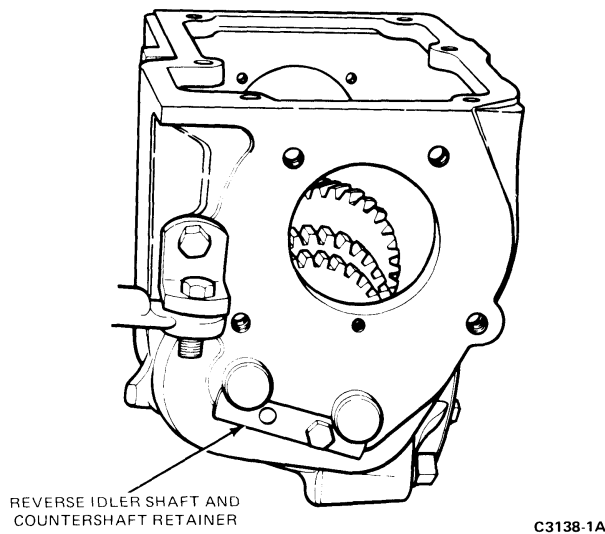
Reverse Idler Gear Shaft and Countershaft Retainer
